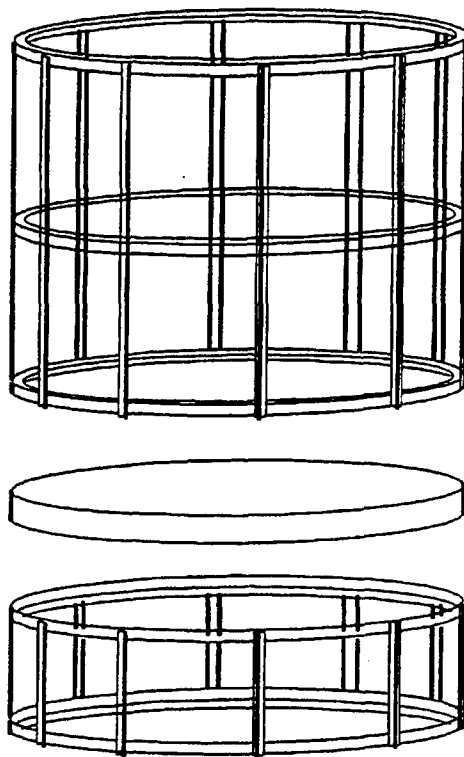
Ring frames, stringers, and end plates.
